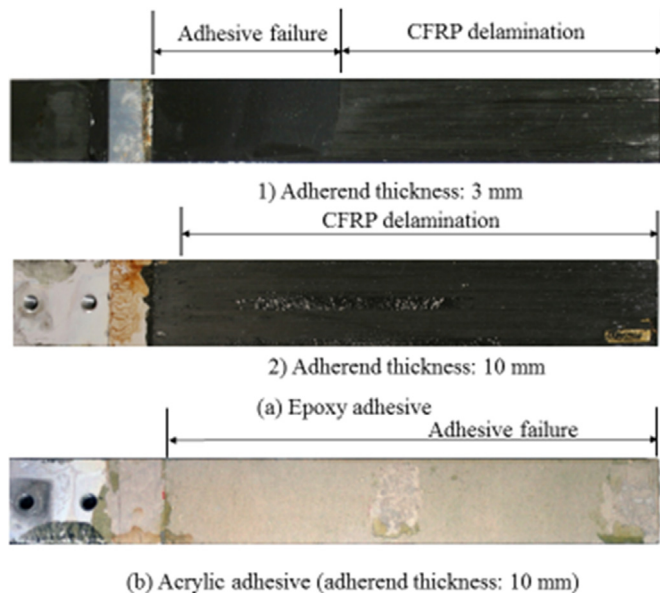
Macroscopic view of fracture surface of the DCB joints with the epoxy and acrylic adhesives.
